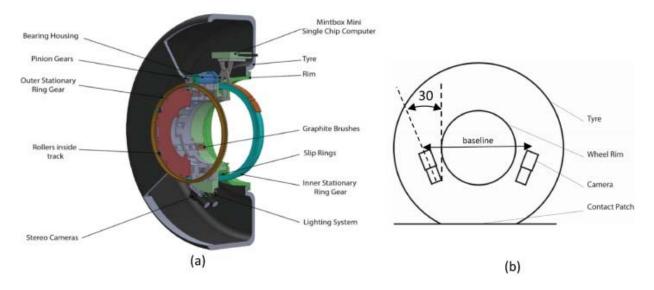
(a) T2Cam system used to measure strain inside the tyre (Guthrie et al. 2017), (b) Side view showing location of cameras mounted inside the wheel.
